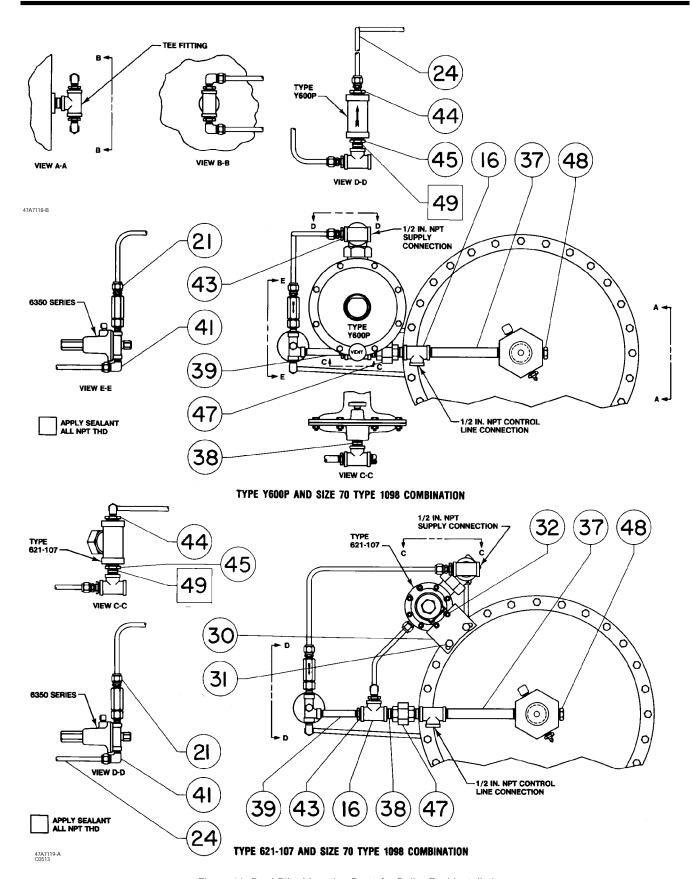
Dual-Pilot Mounting Parts for Boiler Fuel Installations
